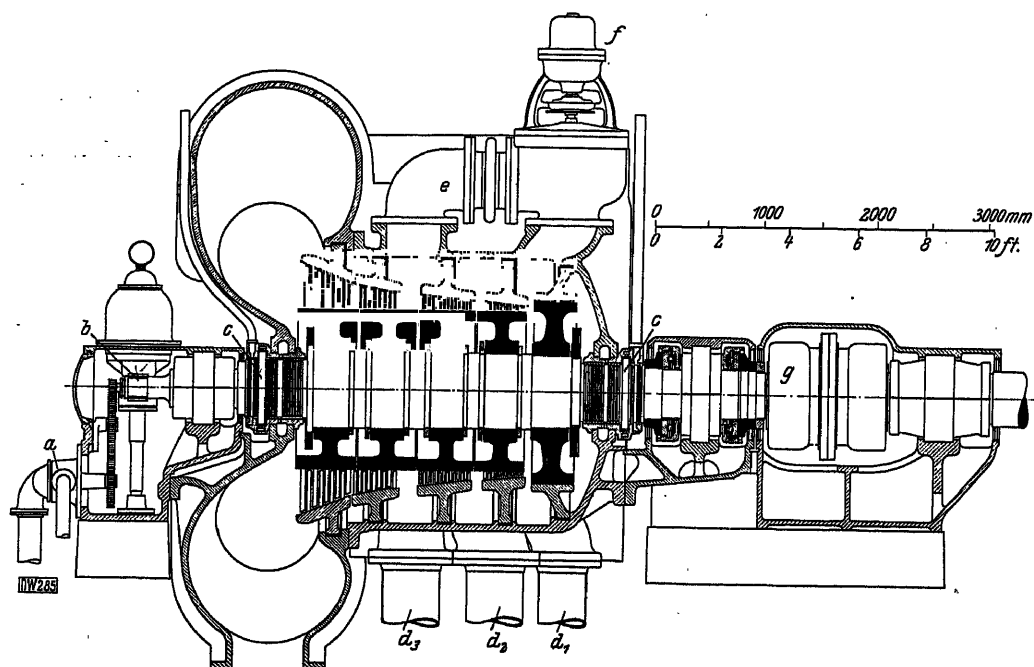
B.B.C., 1800 R.P.M. H.P. turbine of the 160,000 kw. set
